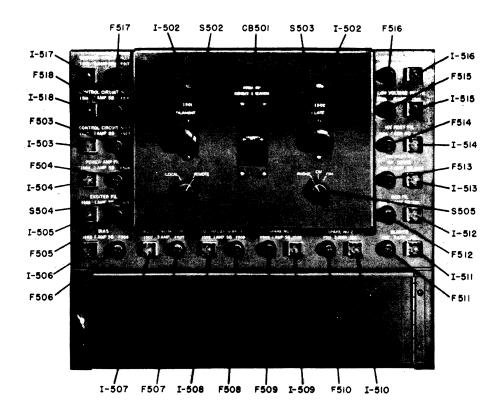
Power Control Assembly, Front Panel, Location of Parts
